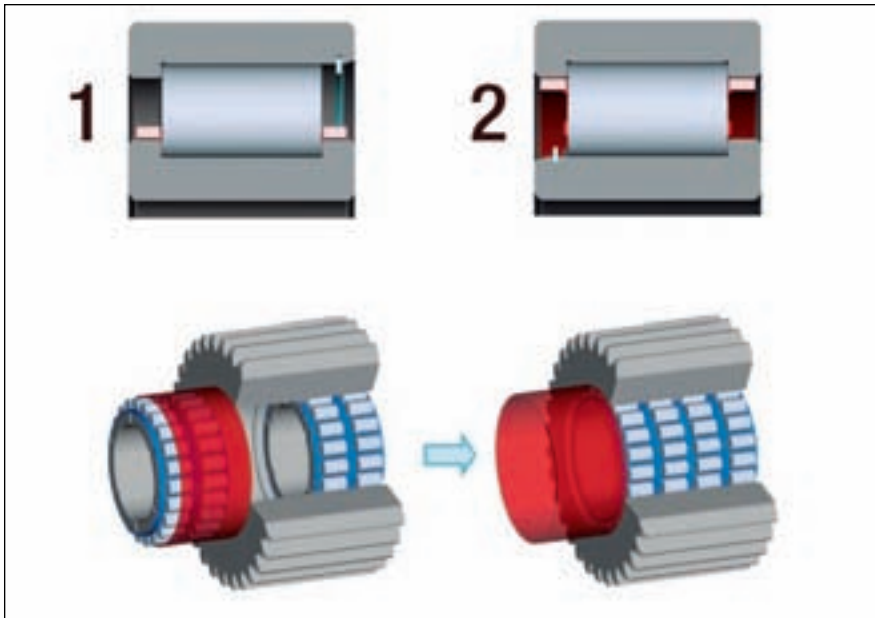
High-capacity cylindrical roller bearings are generally mounted the same way as non-separable bearings (inner-ring and outer-ring shoulder-guided cages shown as 1 & 2, respectively). However, for wind turbine applications, the bearing can be delivered with a mounting sleeve.
